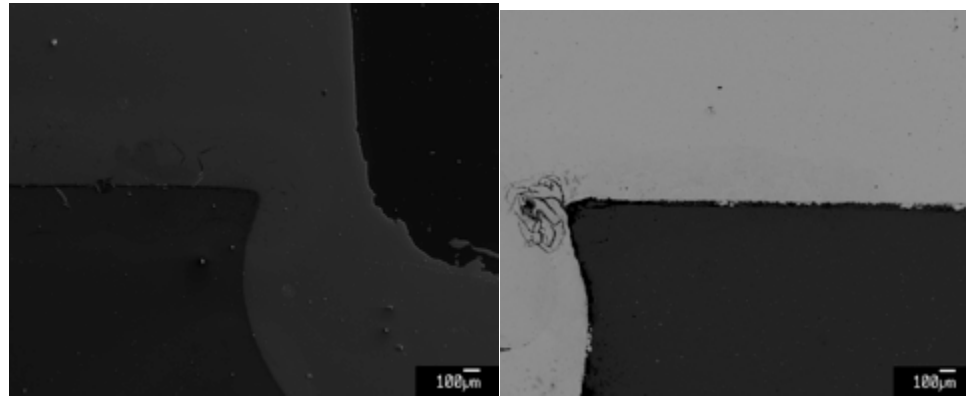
Steel/Al clinching formed interlock. Left: SEI view. Right: Comp view
